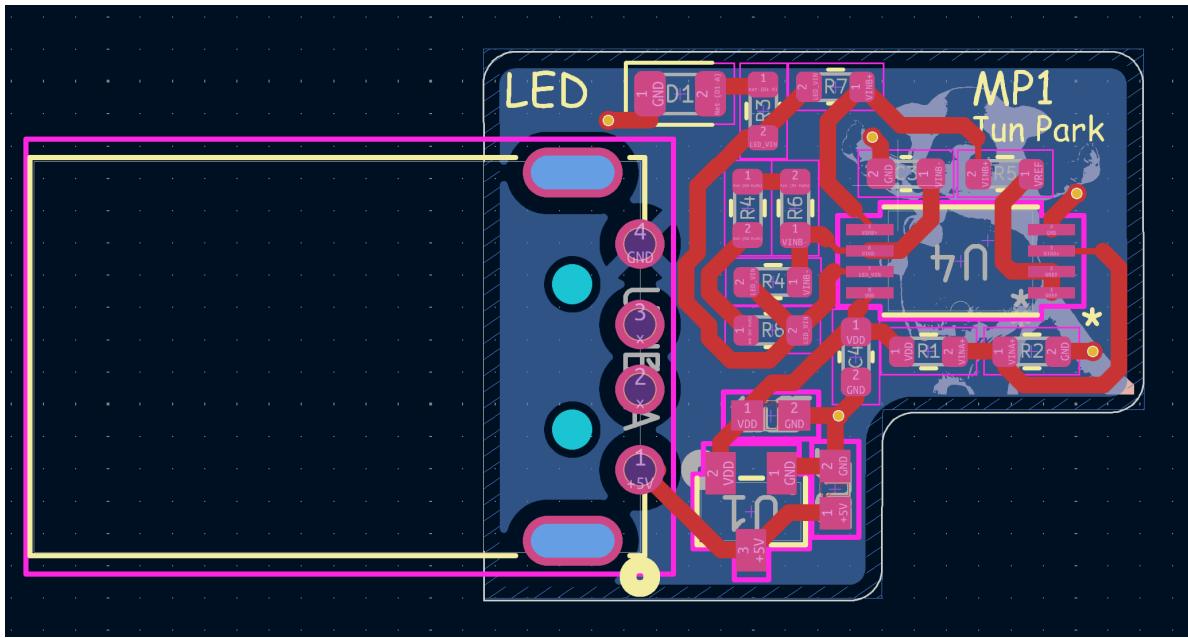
Top-layer PCB layout showing component placement and signal routing. All components are placed on the top layer, and the RC network is routed compactly near the op-amp to minimize parasitic effects.
